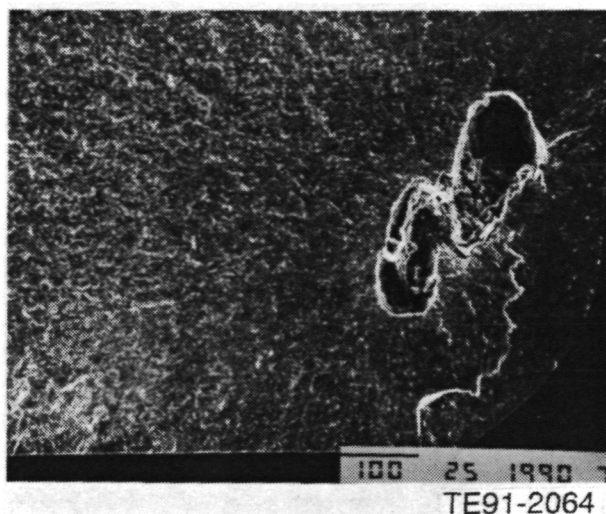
Fracture origin (internal pores) observed in Carborundum sintered SiC rotor S/N FX78523.
